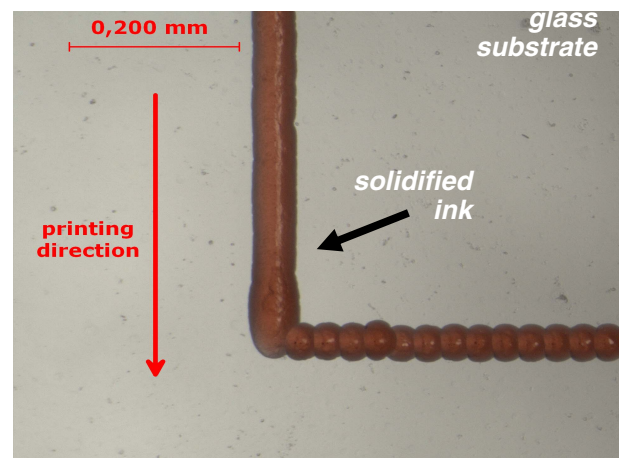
Printed lines in and perpendicular to the printing direction. In printing direction droplets coalesce, whereas perpendicular to it they maintain drop shape.
